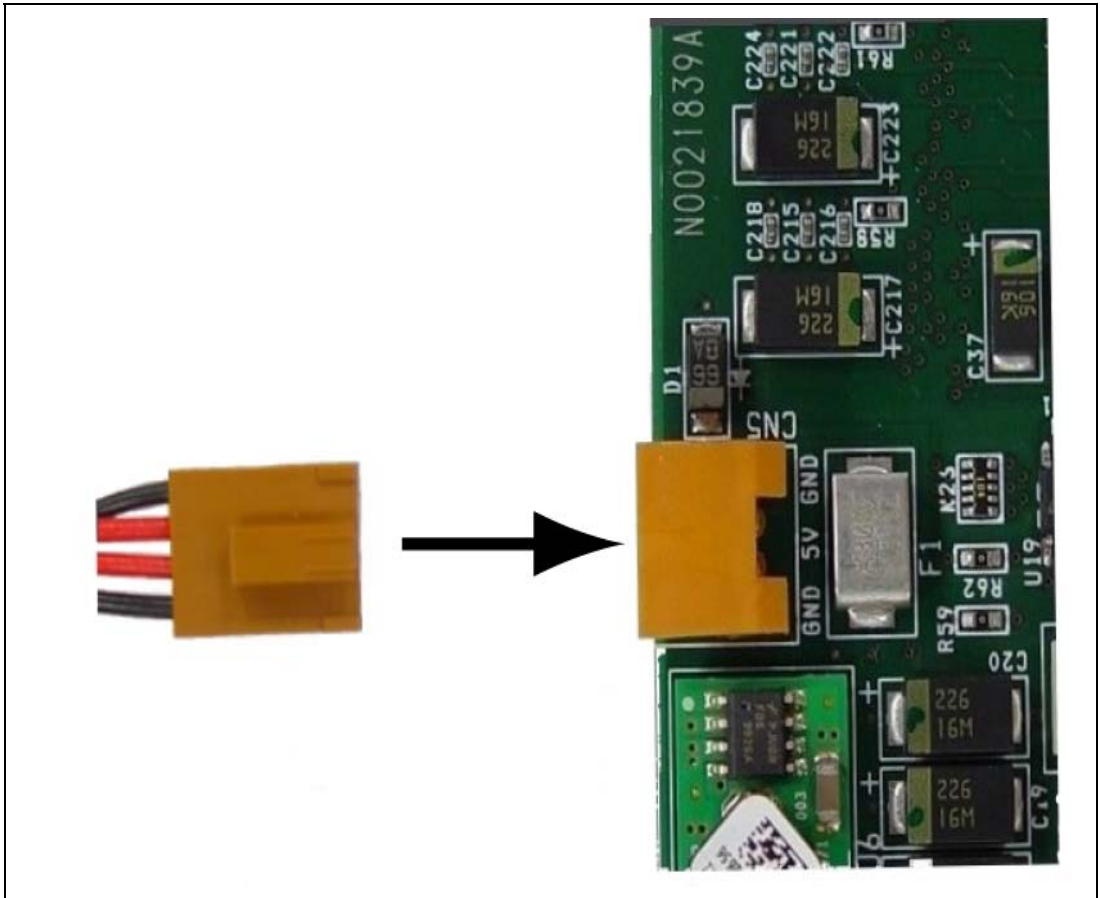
Connecting the Power Cable to the Debugging MCU Board
